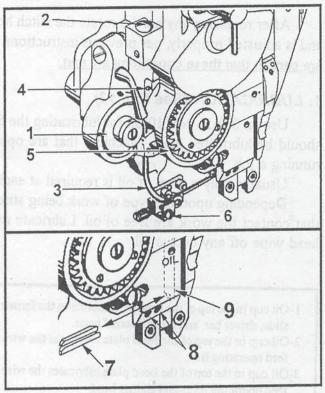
Inspecting Wire Feed Gears, Tubes and Stationary Cutter
